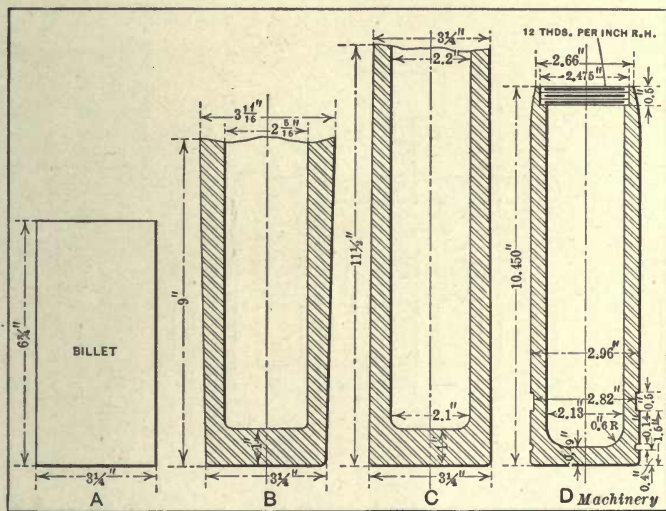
Russian 3-Inch High-explosive Shell from the Blank to the Finished Shell
